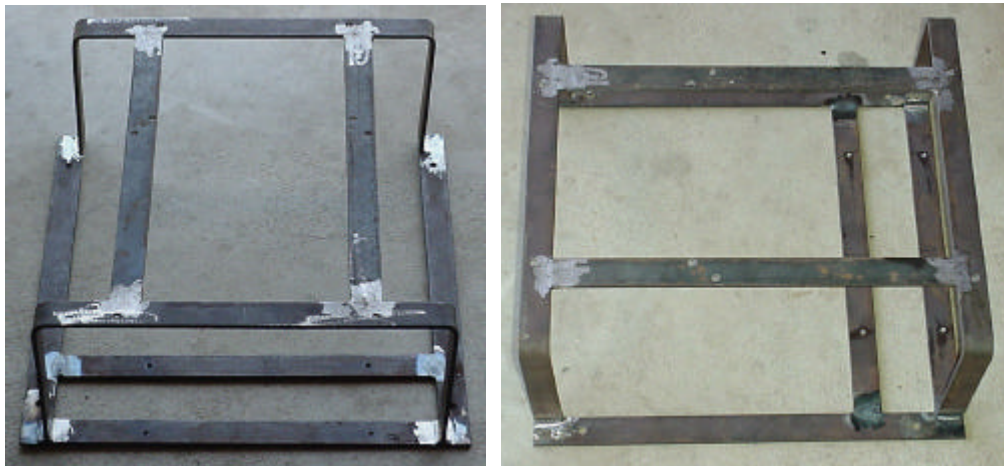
UPS, microcontroller, and motor driver platform frame
